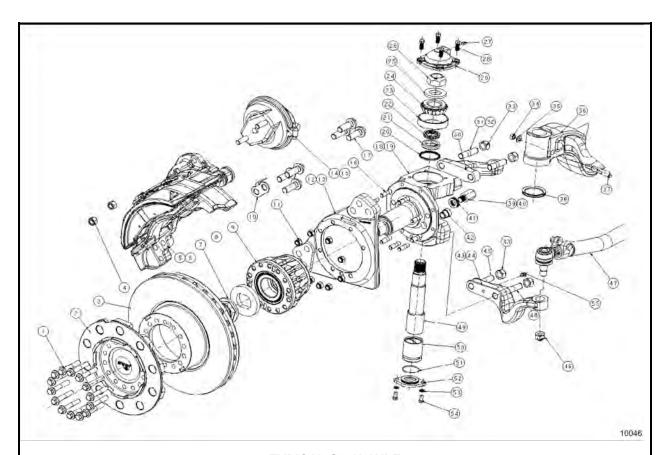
FRONT AXLE ASSEMBLY (I-BEAM)
